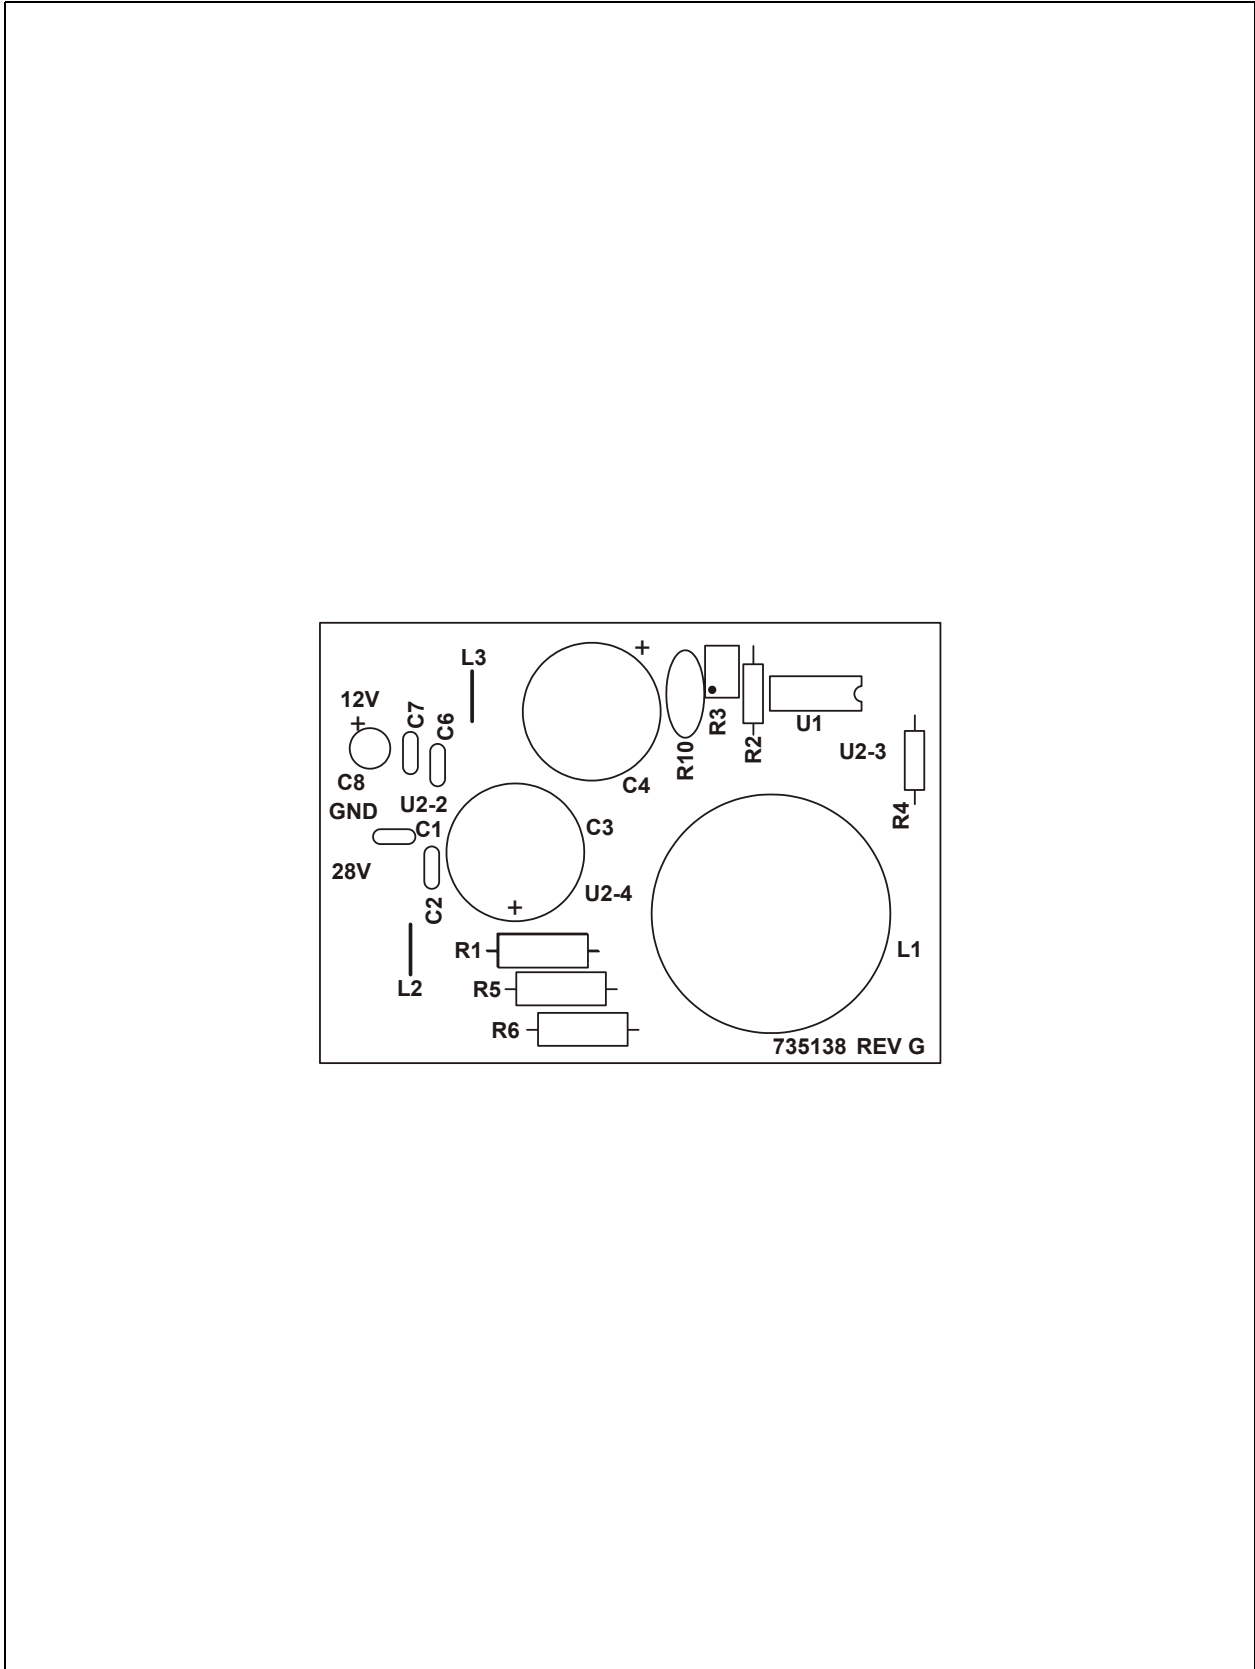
28 Vdc Regulator Board M8A Components Location (735138 Rev. G)
